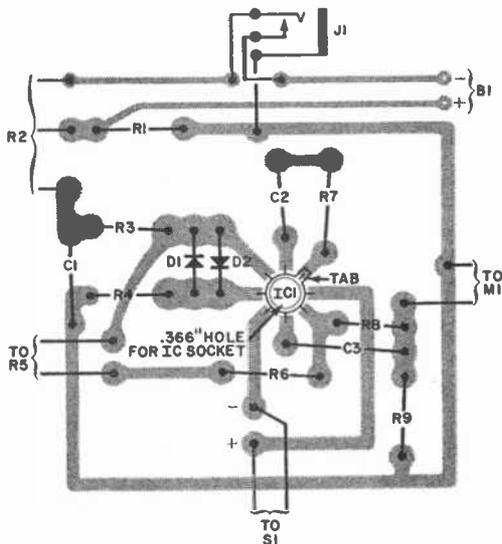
Install the components as shown here. Note that J1 is arranged to close when plug is inserted.
